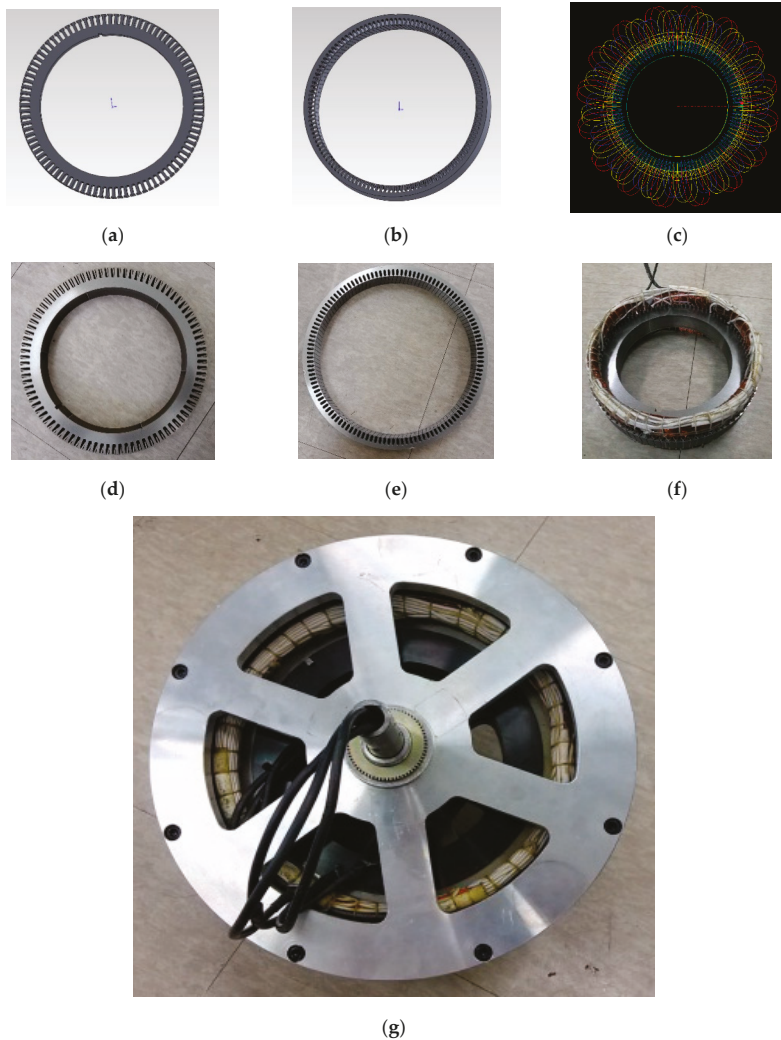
Three-dimensional (3D) modeling images and photographs of actual fabricated components of the outer rotor (induction motor and assembled device: 3D drawing of (a) stator and (b) rotor; (c) two-dimensional (2D) drawing of winding; produced (d) stator, (e) rotor, (f) winding and (g) assembled outer rotor inductor.
